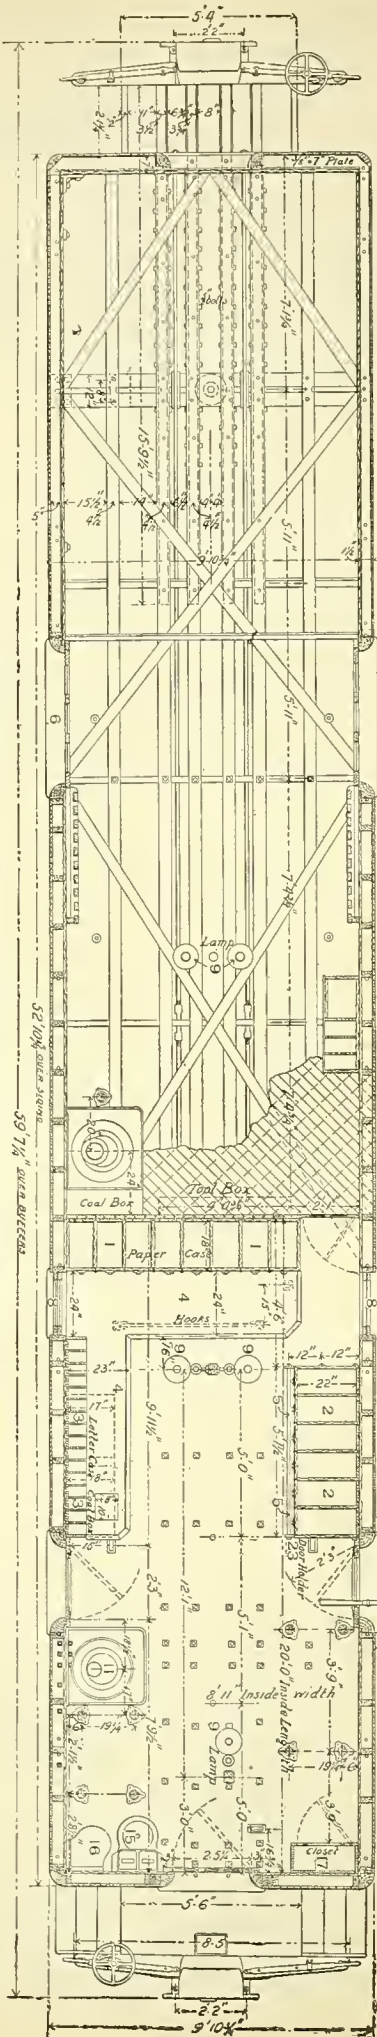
Sectional Plan, Showing Underframing and Floor of 2nd Fl. Mail Compartment.
